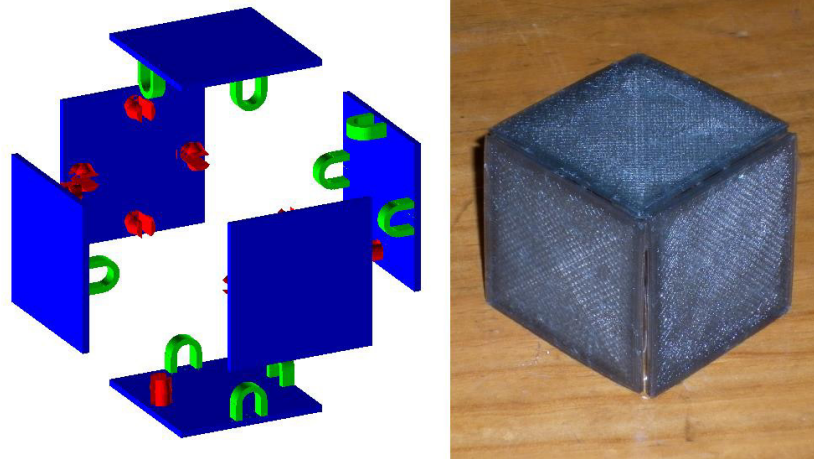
Soft sketch of assembly concept (left); Example of final assembled cube (right)
